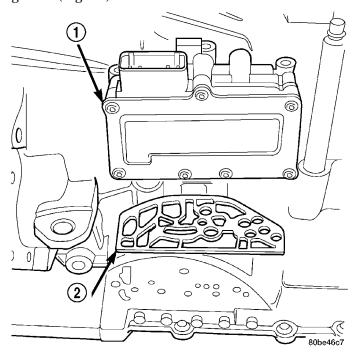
Solenoid/Pressure Switch Assembly and Gasket
